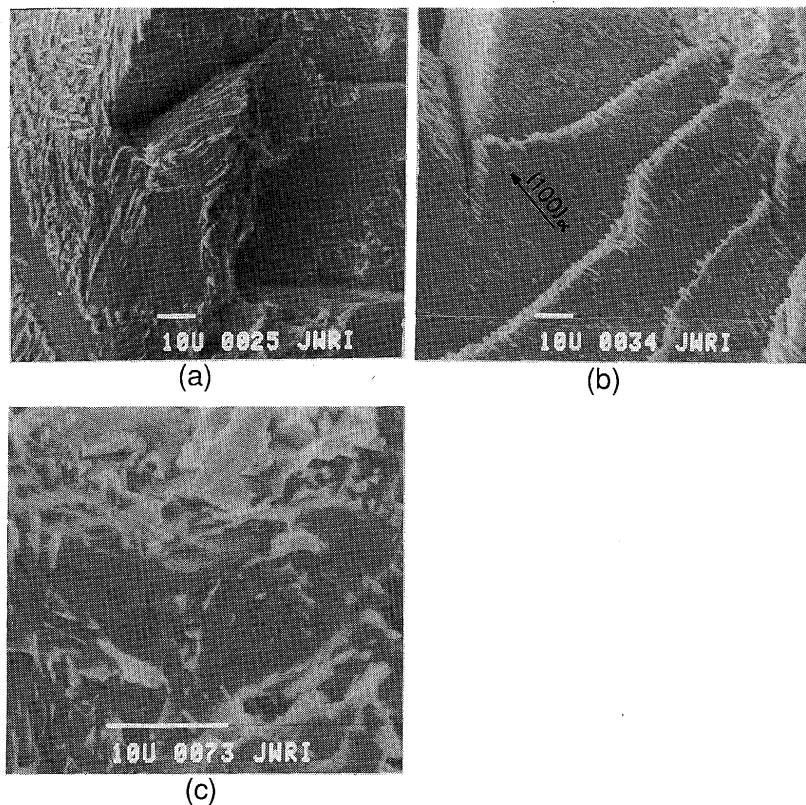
Examples of M-A on etched fracture surfaces.
